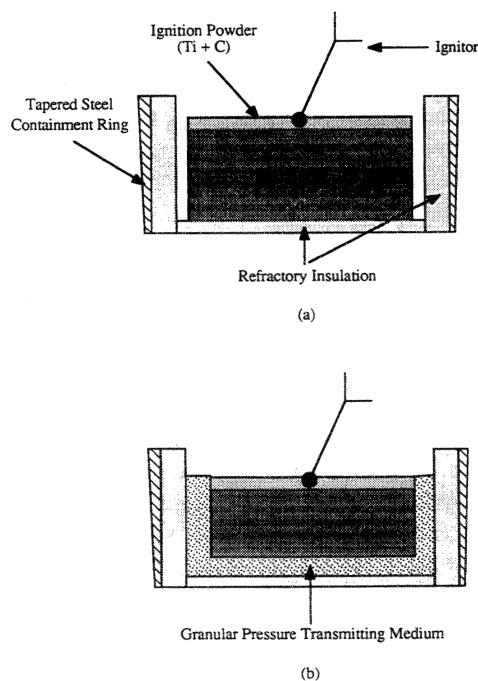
Schematic representation of the hot-matter containment fixtures used in this study: (a) rigid fixture, TiC–5Ni and TiC–25Ni; and (b) modified fixture utilizing granulated pressure transmitting medium, TiC–30Ni.
